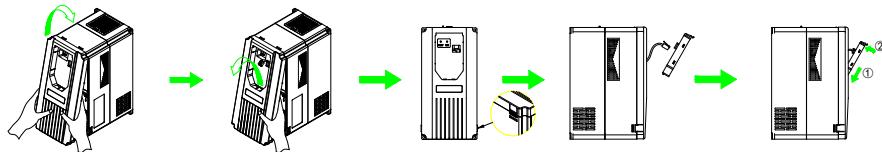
Steps for Disassembly and Installation of Cover Plate of Hope530PM0.75T4~Hope530PM7.5T4 Models
